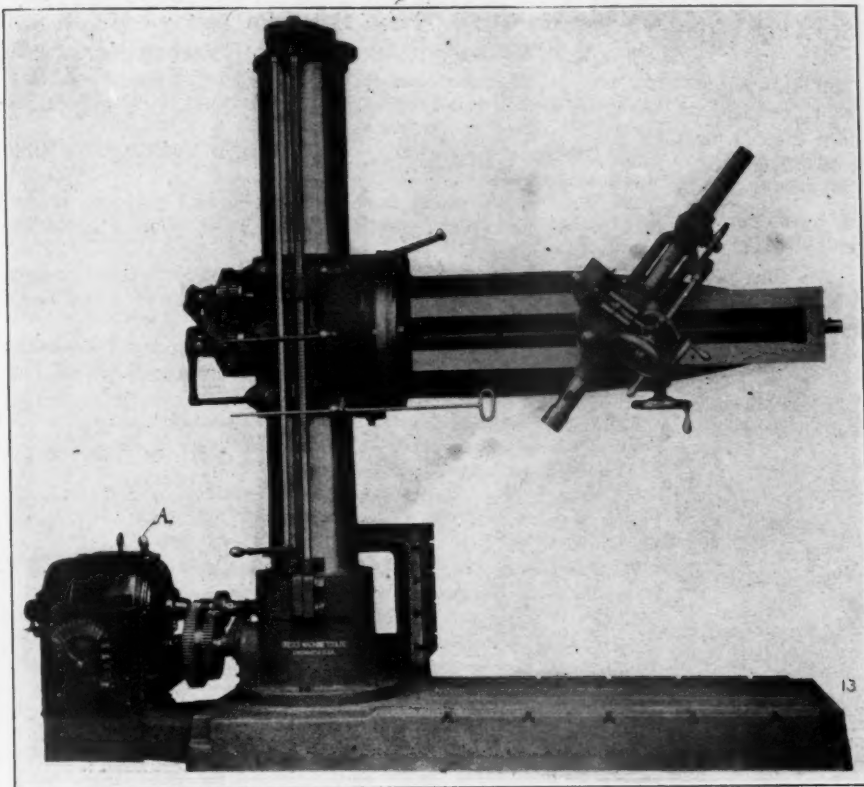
MOTOR-DRIVEN RADIAL DRILL.—DRESES MACHINE TOOL CO.
